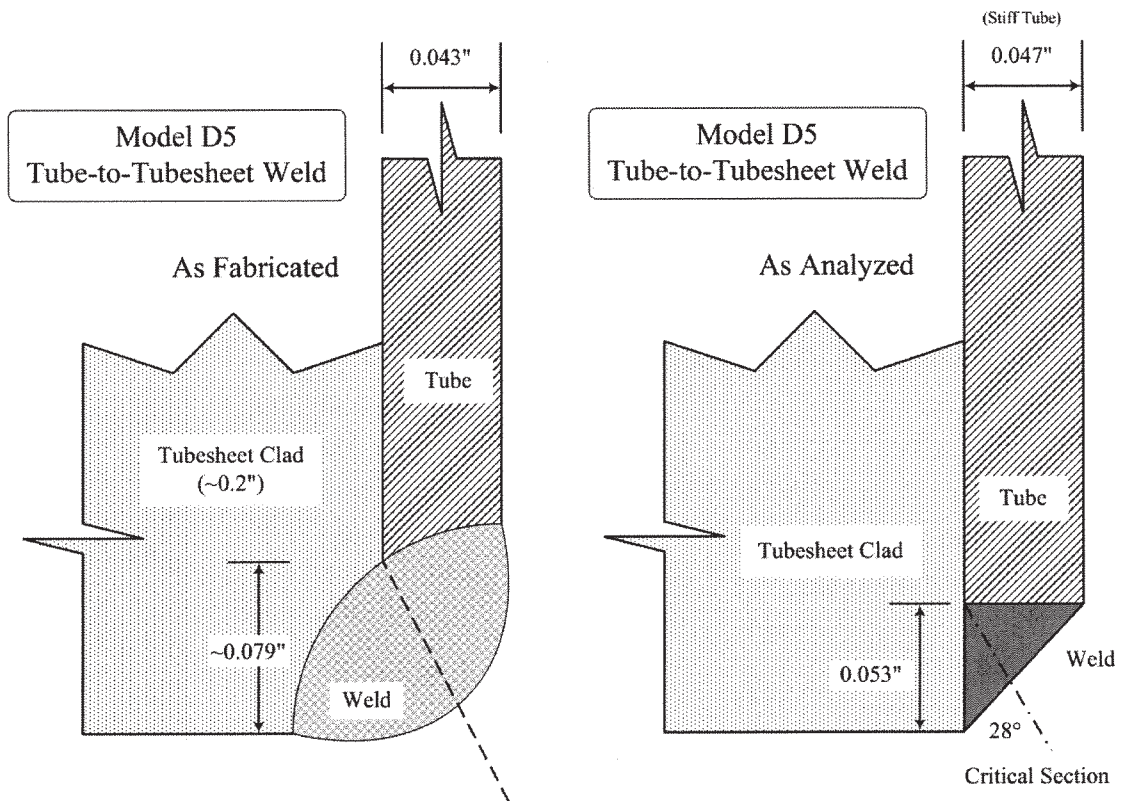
As-Fabricated & Analyzed Tube-to-Tubesheet Welds
